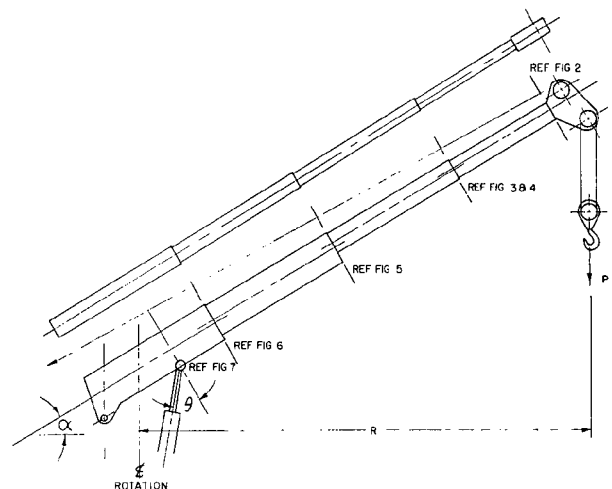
LOADING DIAGRAM—BOOM ASSEMBLY
